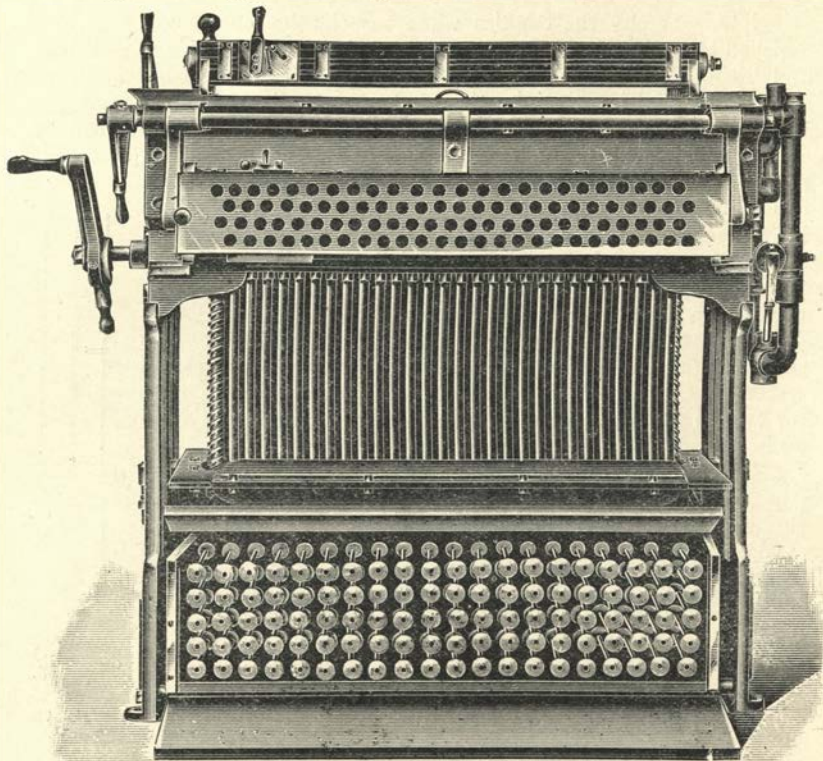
Cowles' Candle Moulding Machine (Front Elevation).
